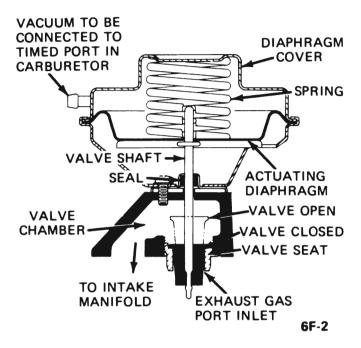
F-2 E.G.R. Valve Cross-Sectional View
